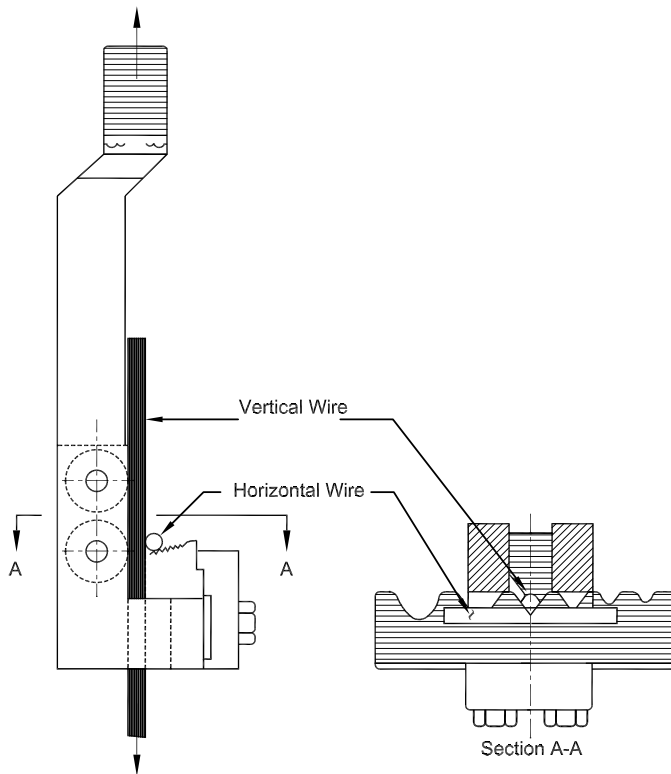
Welded Wire Reinforcement Weld Tester
